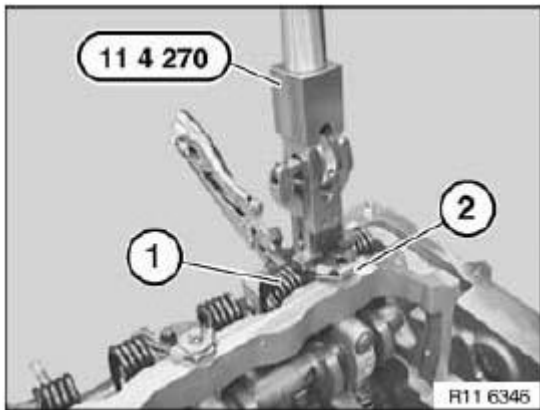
Identifying Special Tool (11 4 270), Return Spring And Metal Lug
